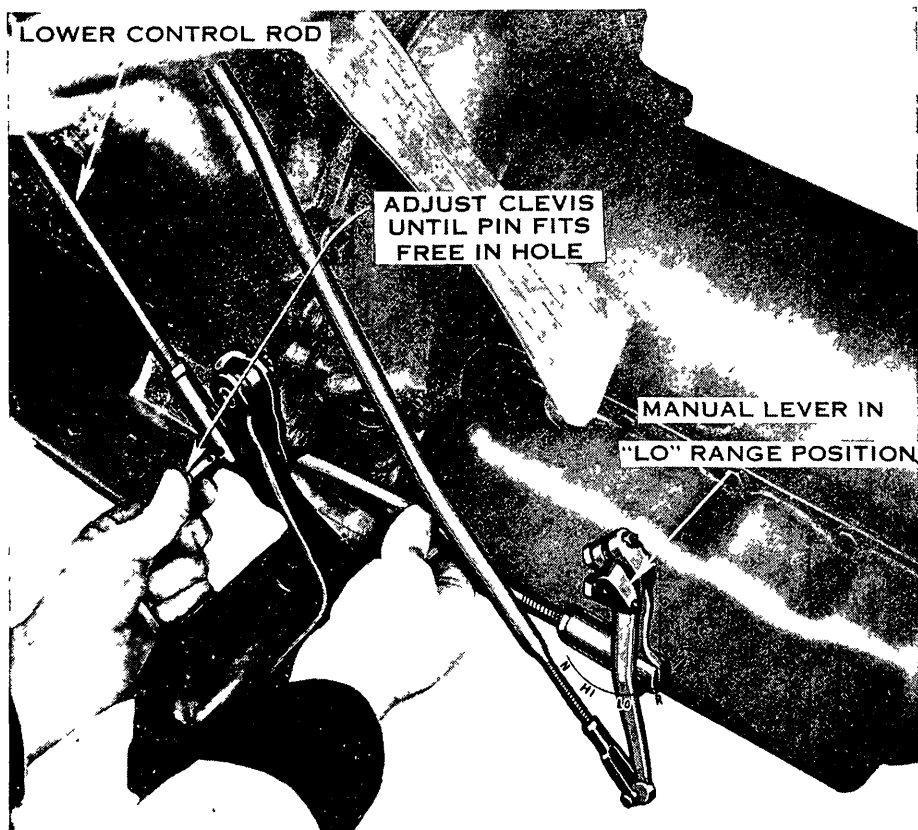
Adjusting Manual control rod, 1940-52 Hydra-Matic
